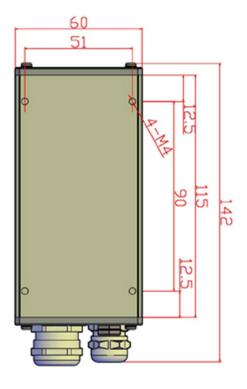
KLS-4812Z KLS7212Z KLS8412Z mounting holes' dimensions (dimensions in millimeters)
